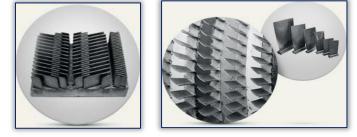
Examples of machined parts with ECM made from chromium-nickel heat-resistant alloys [9]
